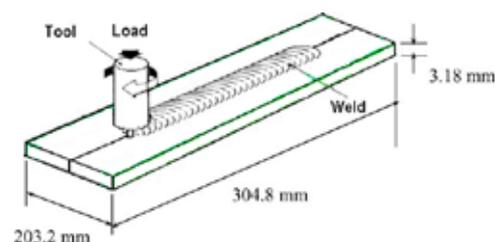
Geometry configuration of friction stir welding conducted by X.K. Zhu & Y.J. Chao
